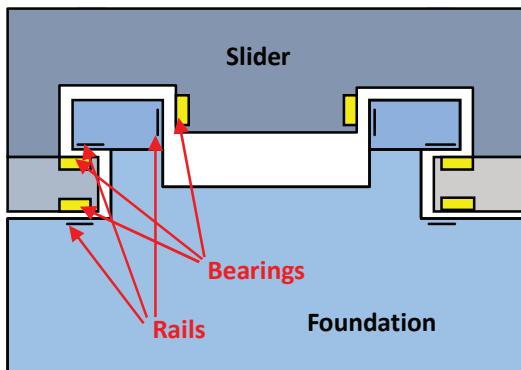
A TYPICAL CLOSED OIL HYDROSTATIC GUIDEWAYS
